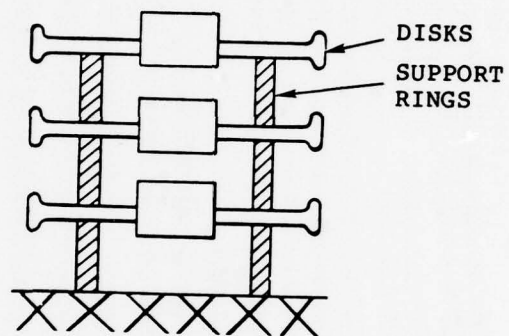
Loading Arrangement of Compressor Disk in HIP Autoclave Showing Rig Support Tooling.
